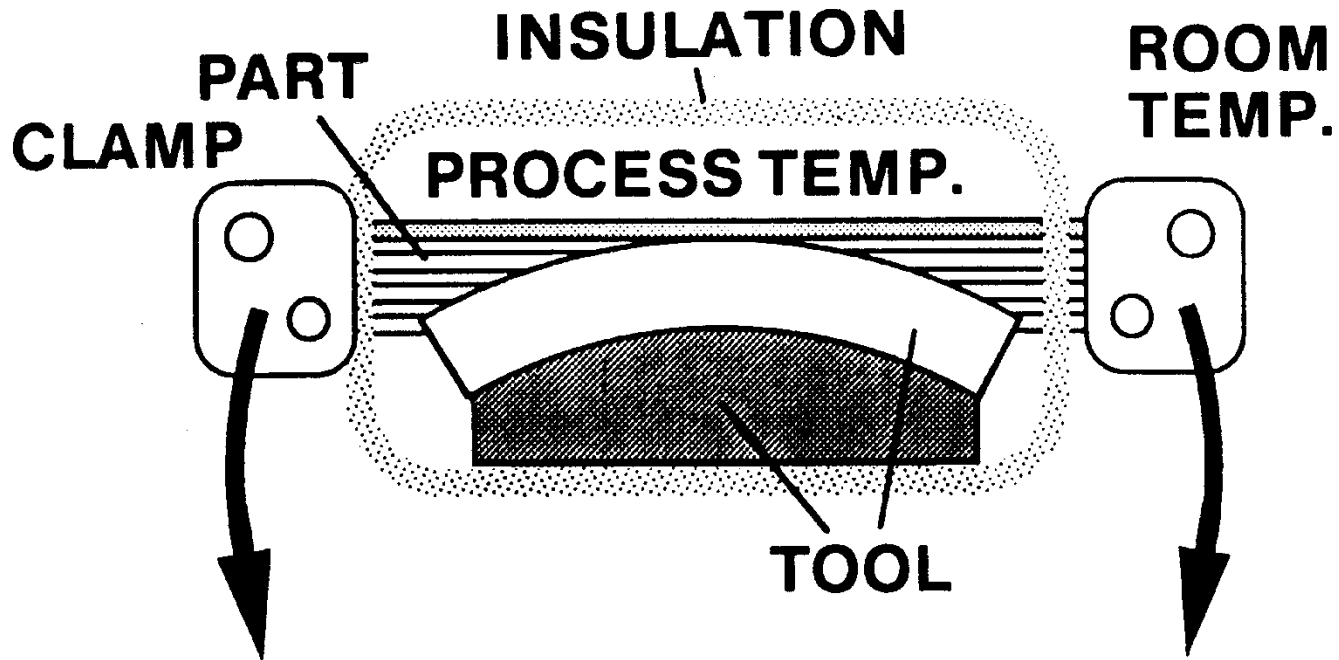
Vacuum-forming fixture design for use in autoclaves
